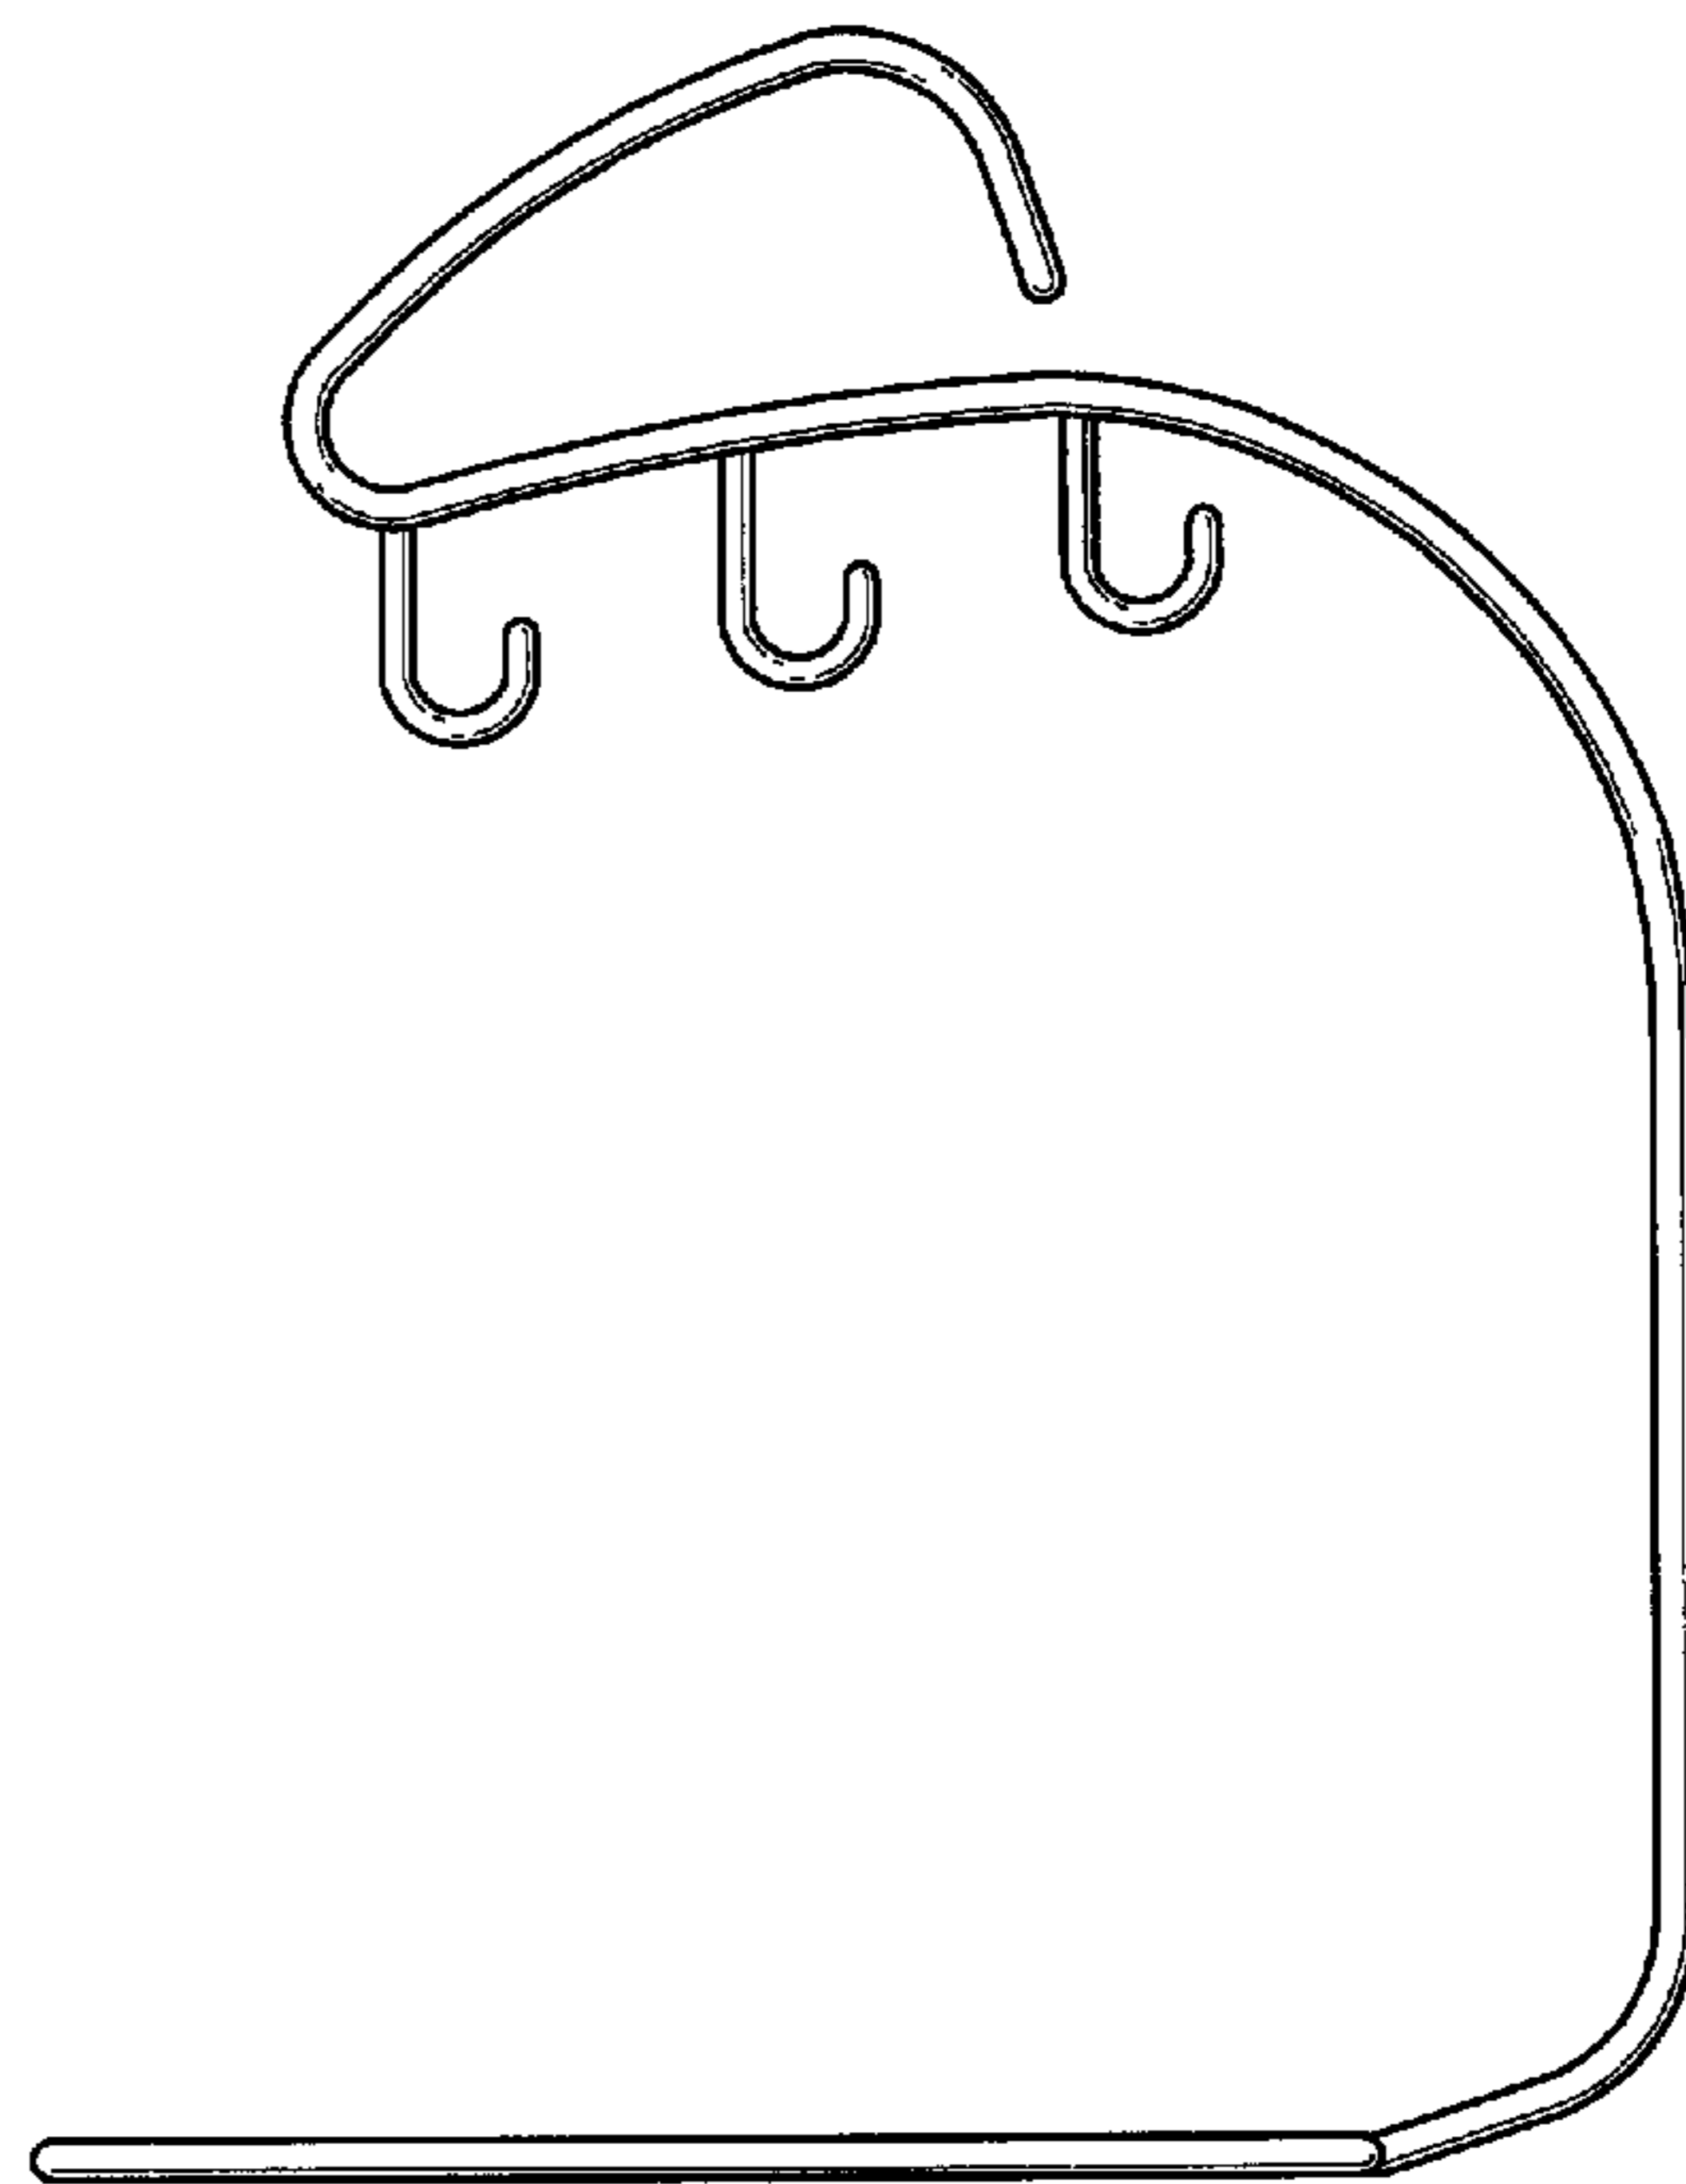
is a side elevation view of a skewer holder formed in accordance with one embodiment of the present invention; FIG. 2 is a top planar view of the skewer holder of FIG. 1; FIG. 3 is a bottom planar view of the skewer holder of FIG. 1; FIG. 4 is an end planar view of the skewer holder of FIG. 1; FIG. 5 is an end planar view of the skewer holder of FIG. 1; FIG. 6 is a side elevation view of a skewer holder formed in accordance with another embodiment of the present invention; FIG. 7 is a top planar view of the skewer holder of FIG. 6; FIG. 8 is a bottom planar view of the skewer holder of FIG. 6; FIG. 9 is an end planar view of the skewer holder of FIG. 6; and, FIG. 10 is an end planar view of the skewer holder of FIG. 6.
